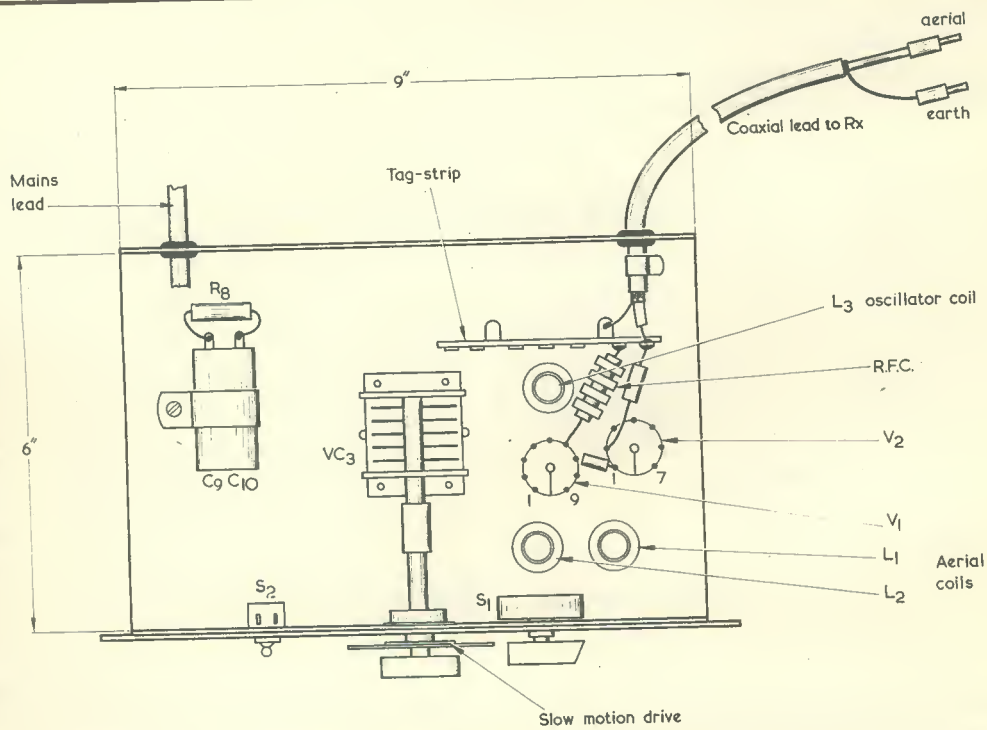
Under-chassis view of the prototype, indicating the basic layout. Chassis dimensions are intended as a guide only
